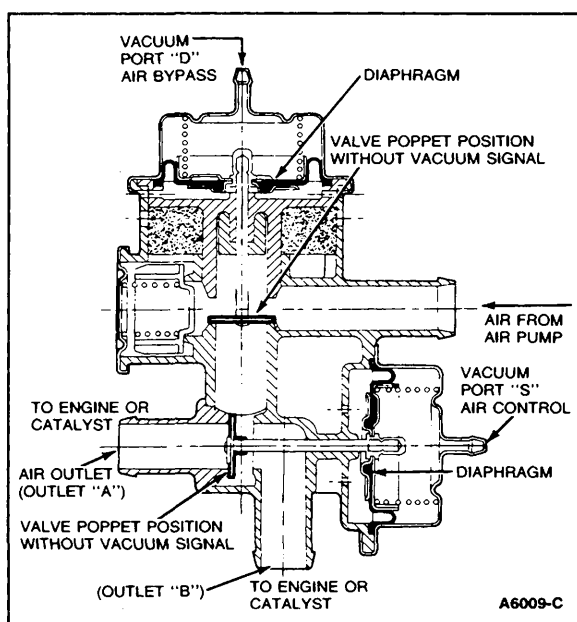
Valve Assembly — Exhaust Air Supply Control (Normally Closed) Without Bleed
